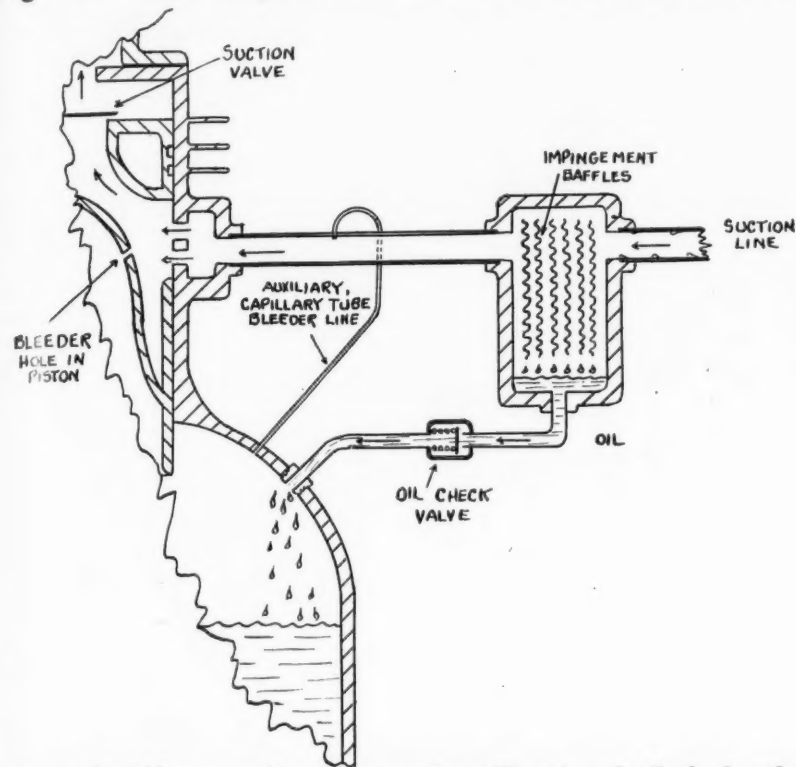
Lowside, or suction oil separator with external oil check valve. Compressor has side-ported piston, with suction valve in its head. Bleeder hole is located in piston, but auxiliary capillary tube bleeder is also shown.
